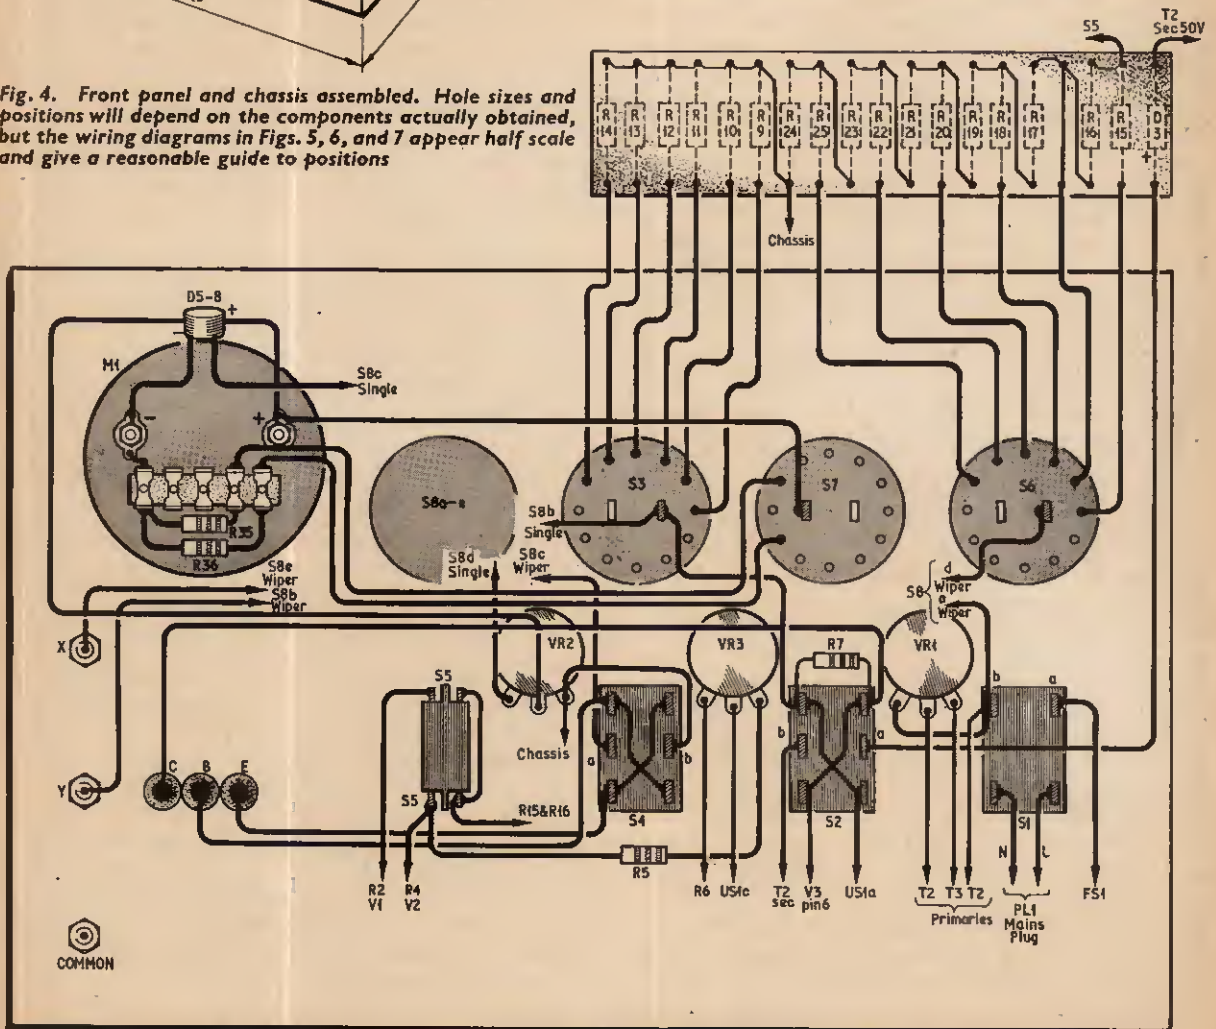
Wiring the components on the front panel. The component group board is tilted up to show connections, but is in fact fitted to brackets on the front panel. This drawing appears approximately half scale
